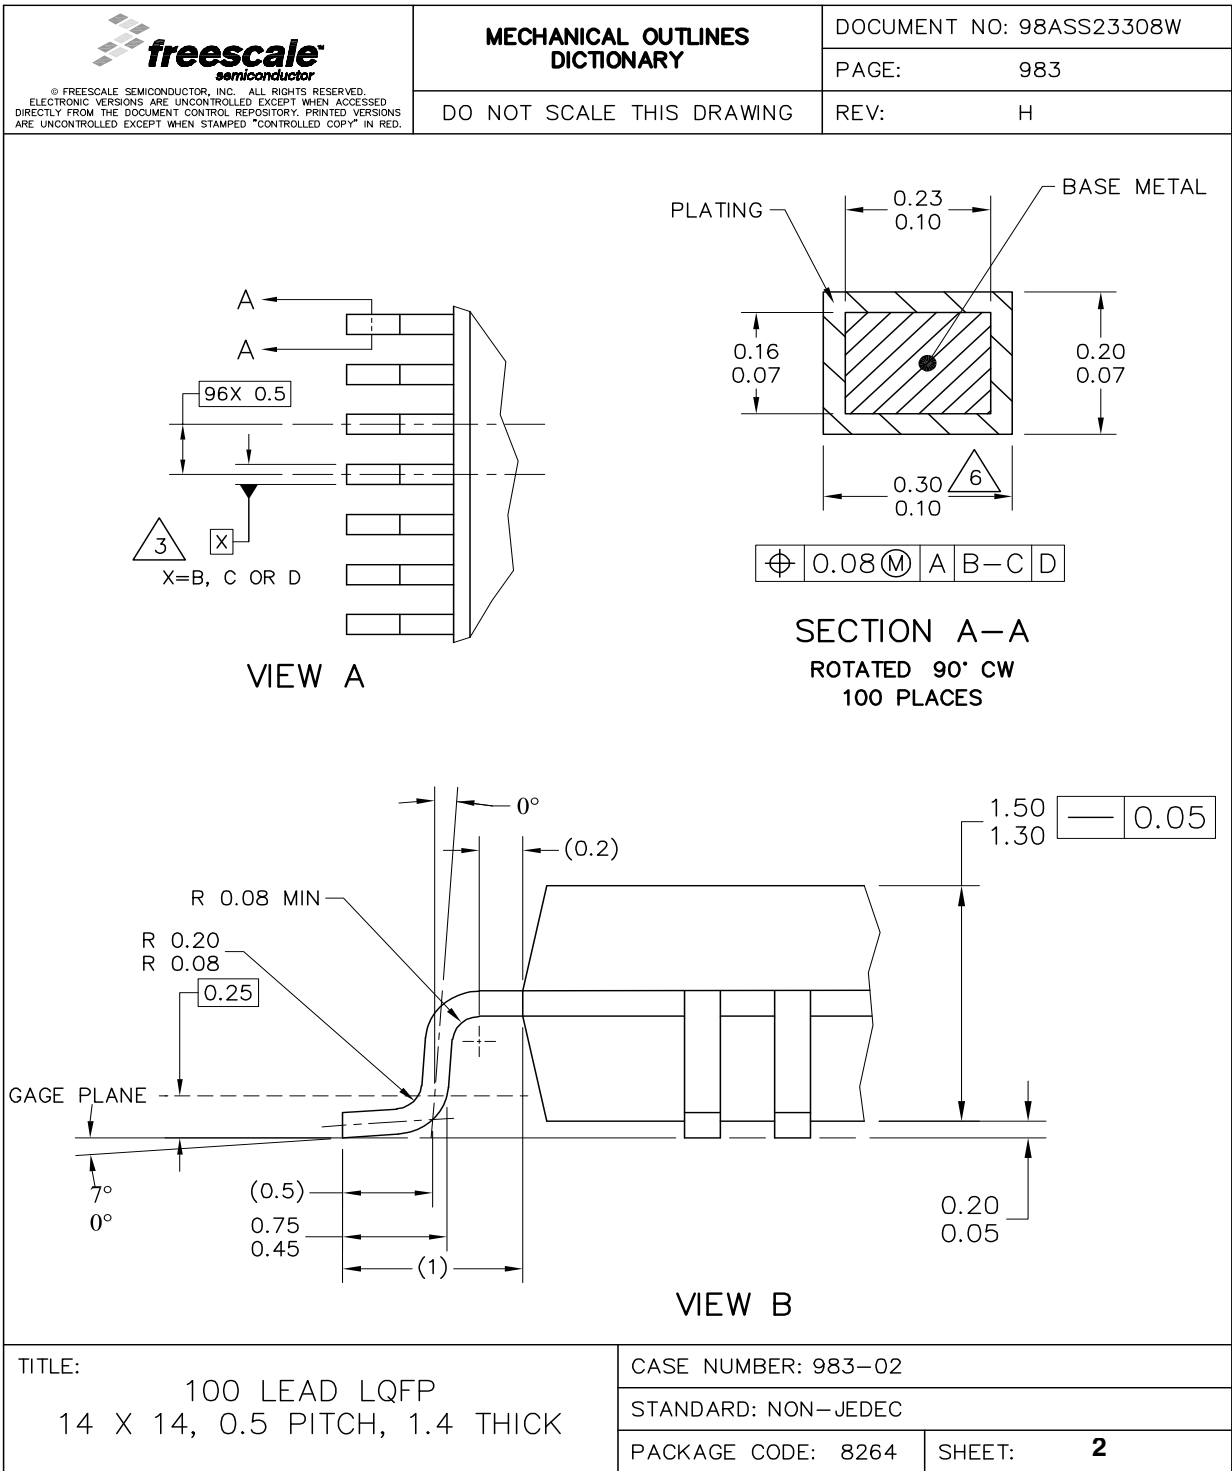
100 LQFP package mechanical drawing (part 2 of 3)
